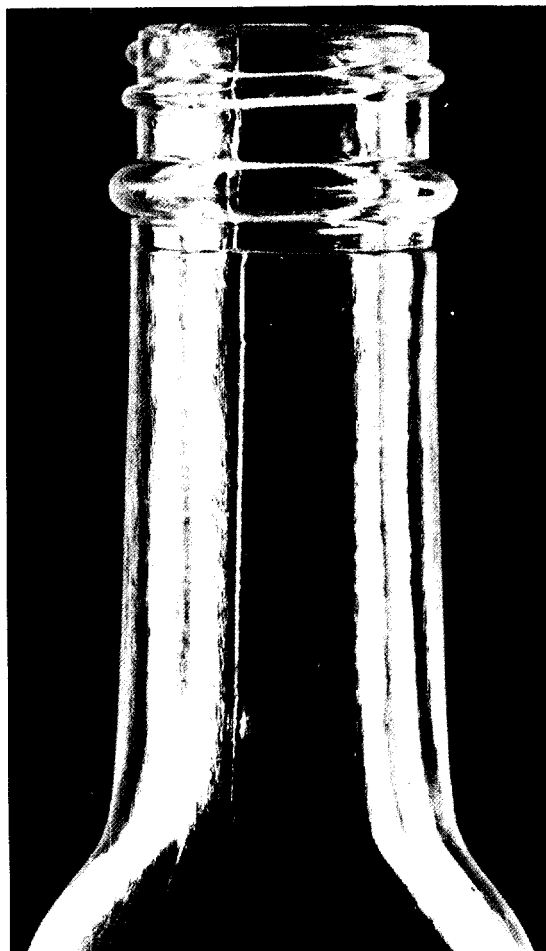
Close-up view of a container finish, showing the large number of seams left by the mold parts (*Photo by R. Chan*).
